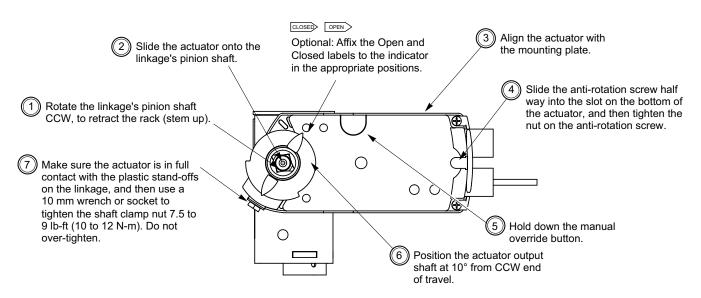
Mounting MX41-6153 and Setting up Actuator/Linkage/Valve Assembly.
